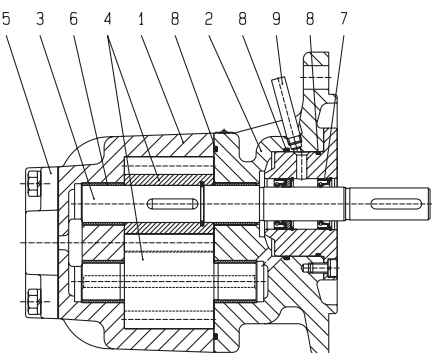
Pump without outboard bearing, special code 309 (Vacuum design)
